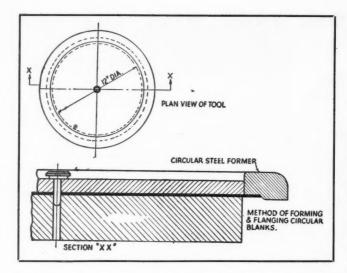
Drawing illustrating use of metal ring in forming and flanging small circular blanks.
